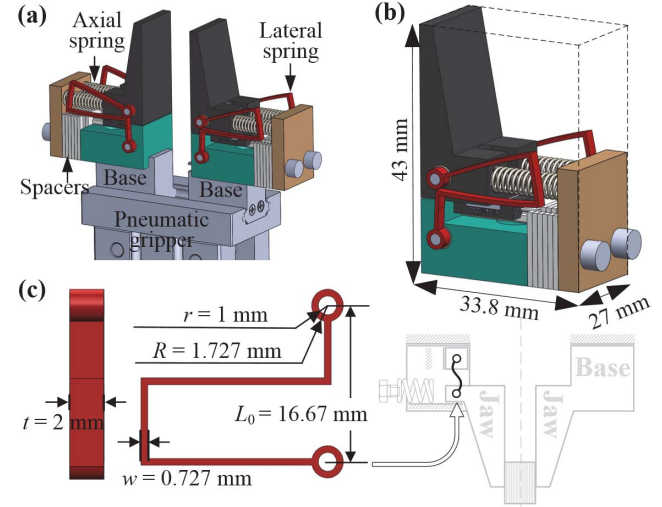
(a) Gripper prototype with two FRMs. (b) Dimension of the FRM. (c) Dimension of the lateral spring.
